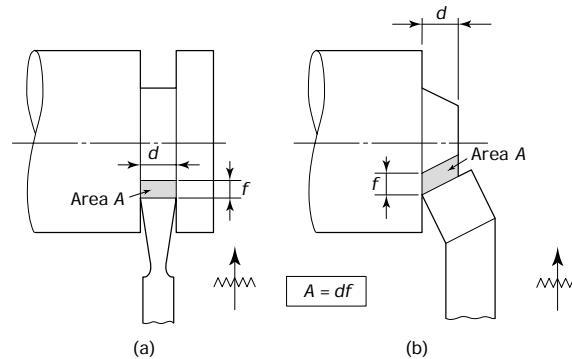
Feed and depth of cut for perpendicular turning ($A = df$): (a) orthogonal cutting (grooving and parting off); (b) oblique cutting (surfacing)
